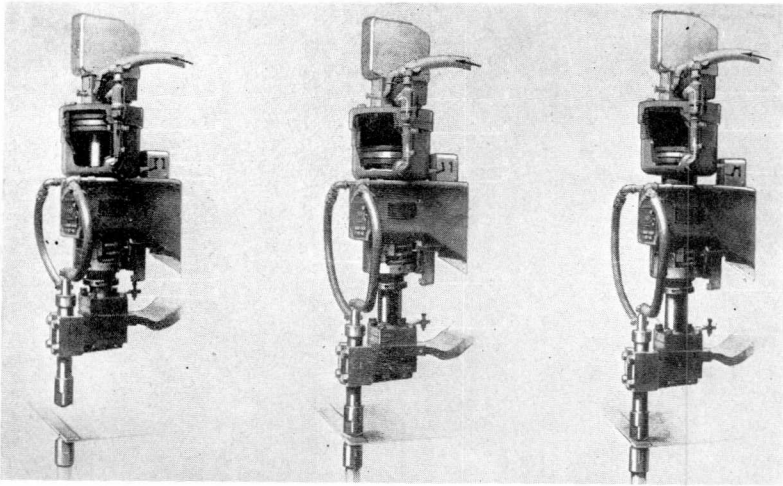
A modern pneumatic spot welder head showing piston in position.
